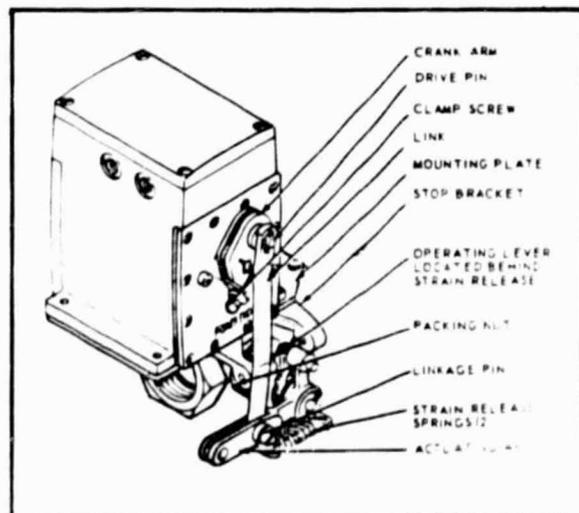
TYPICAL COMBINATION OF V51E VALVE, Q100A MOTOR, AND Q100A LINKAGE ASSEMBLY.
